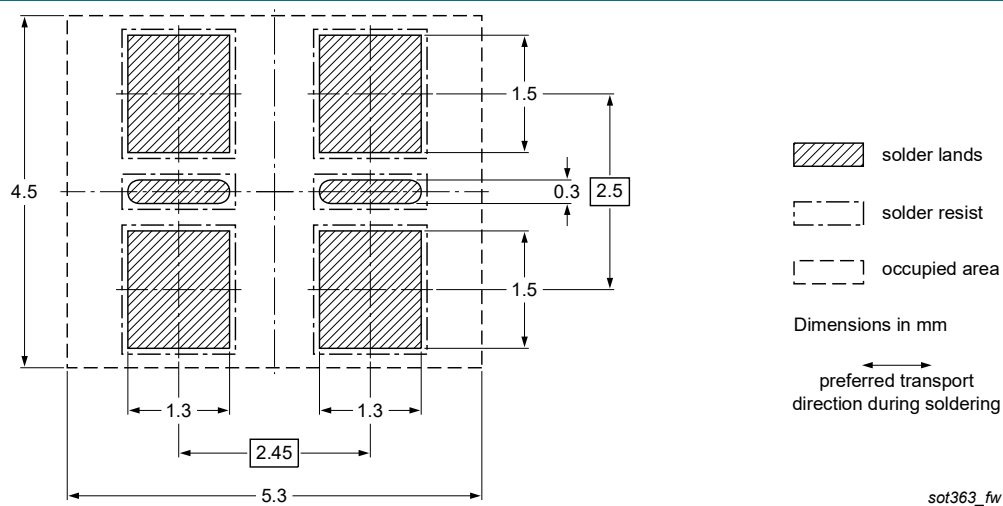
Wave soldering footprint for TSSOP6 (SOT363)
